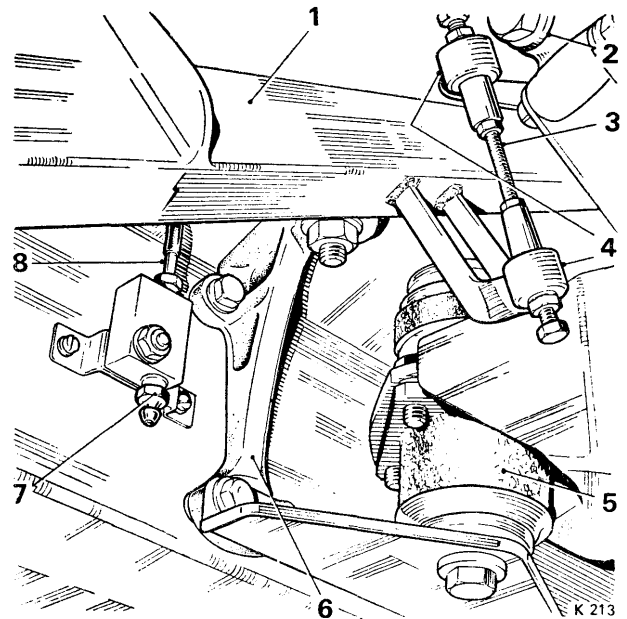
REMOTE BLEED SCREW—REAR HEIGHT CONTROL RAM
